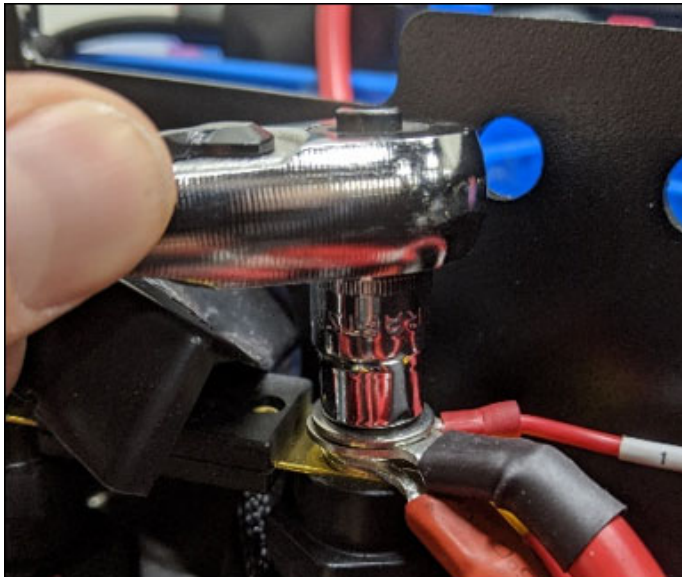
Remove the bolts that secure the red and black cables (red cables shown)
